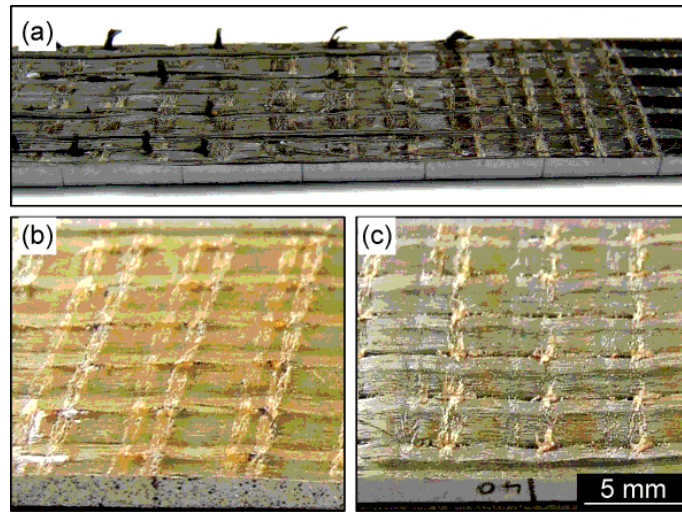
(a) Mode I fracture surface of 0.5% tufted DCB specimen; (b) and (c) opposing fracture surfaces of mode II ELS control specimen with non-structural stitching yarns
